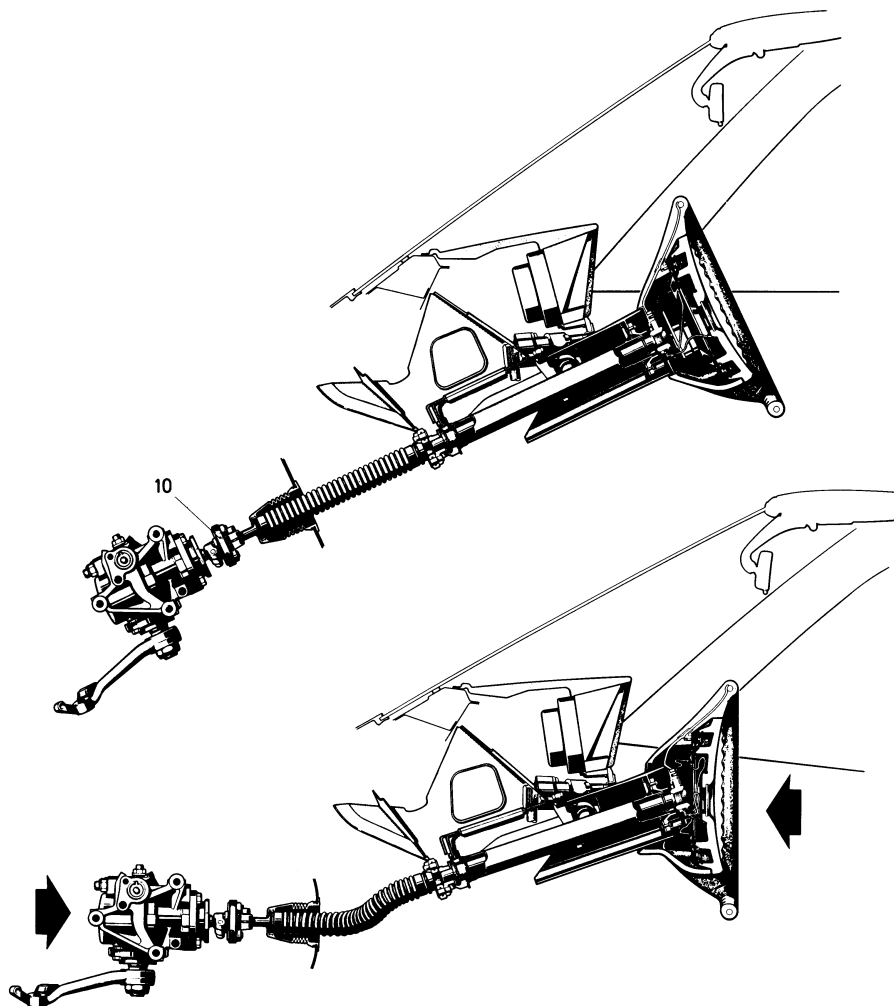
Mercedes Benz safety steering tube and dished steering wheel; it is fixed to the recirculating ball steering gear with a compliant 'joint'. The bottom illustration shows the corrugated tube bending out in a head-on crash. The illustration also shows the energy-absorbing deformation of the steering wheel and the flexibility of the steering gear mounting.
